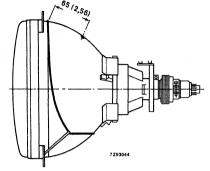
Position of degaussing coil on the display tube; dimensions are given in mm, and in inches between brackets.
